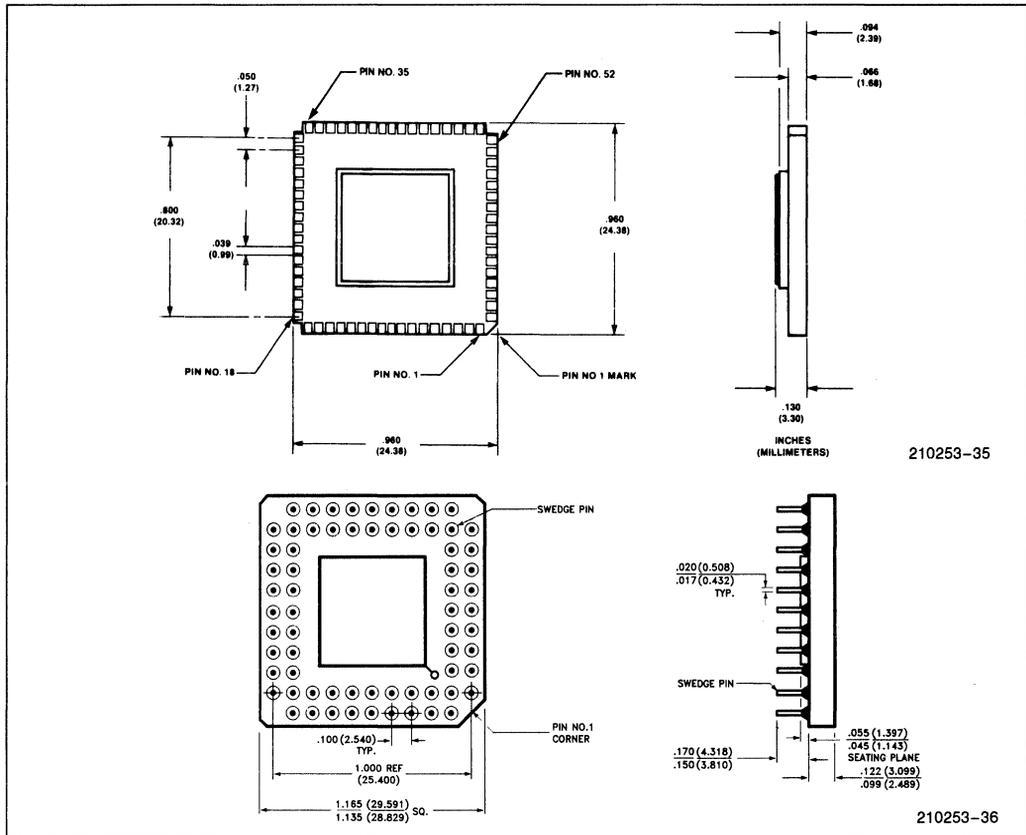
JEDEC Type A Package (Top) and Pin Grid Array Package
